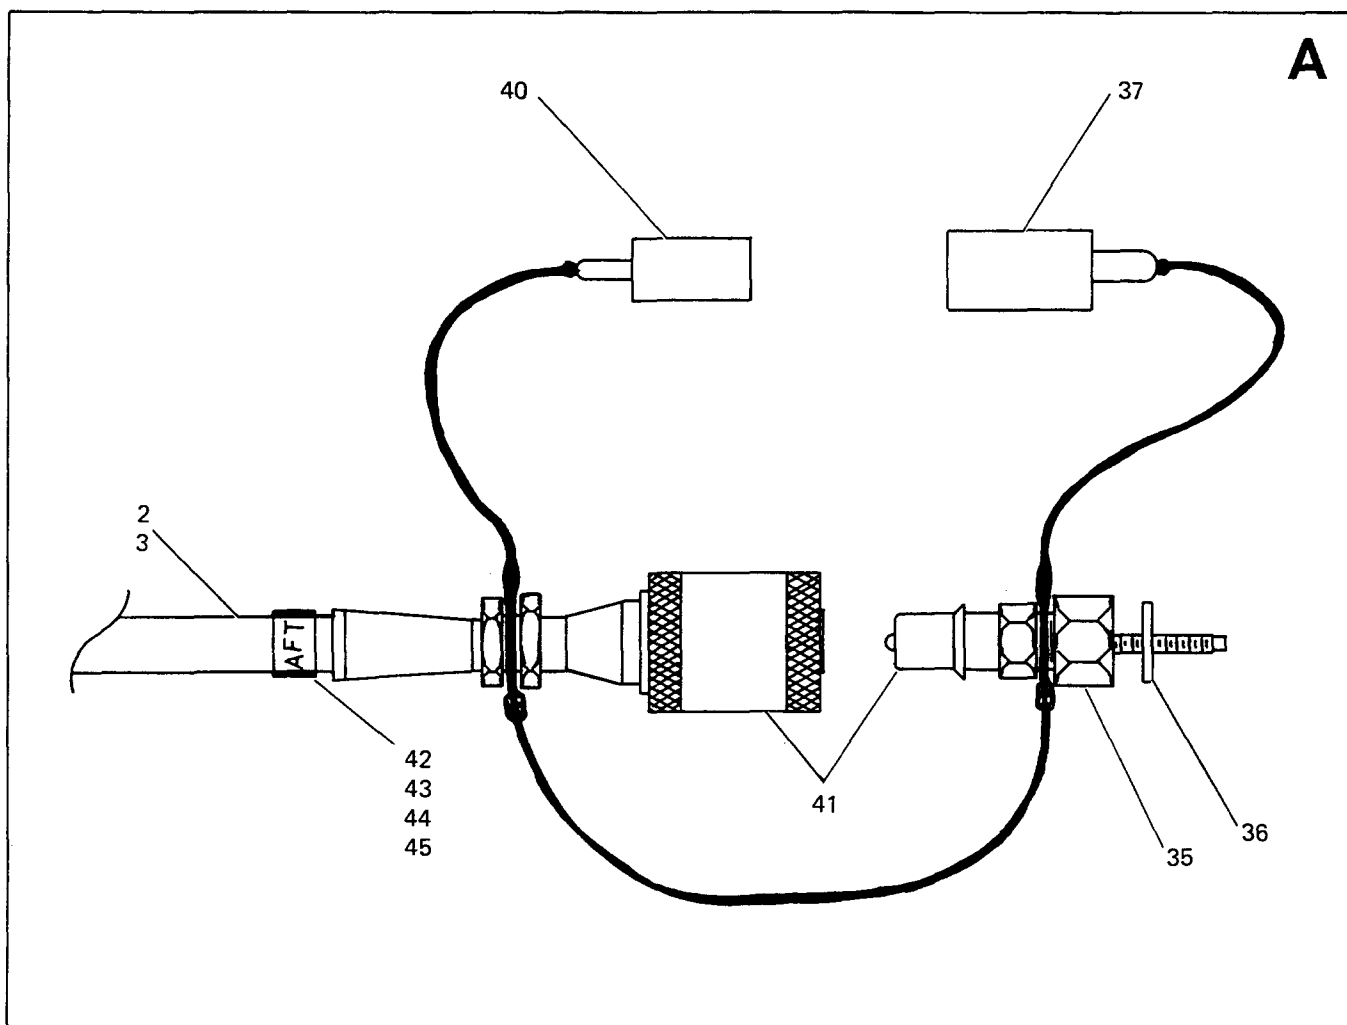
Panel Assembly (Sheet 3 of 3)
